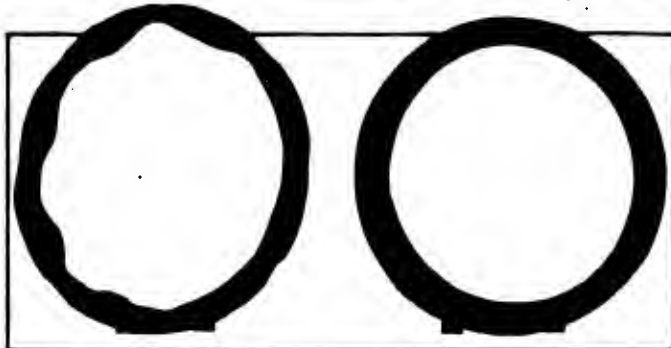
Clutch ring casting after testing by machining down to  $\frac{1}{8}$  inch and subjecting to heavy blows with a hammer
